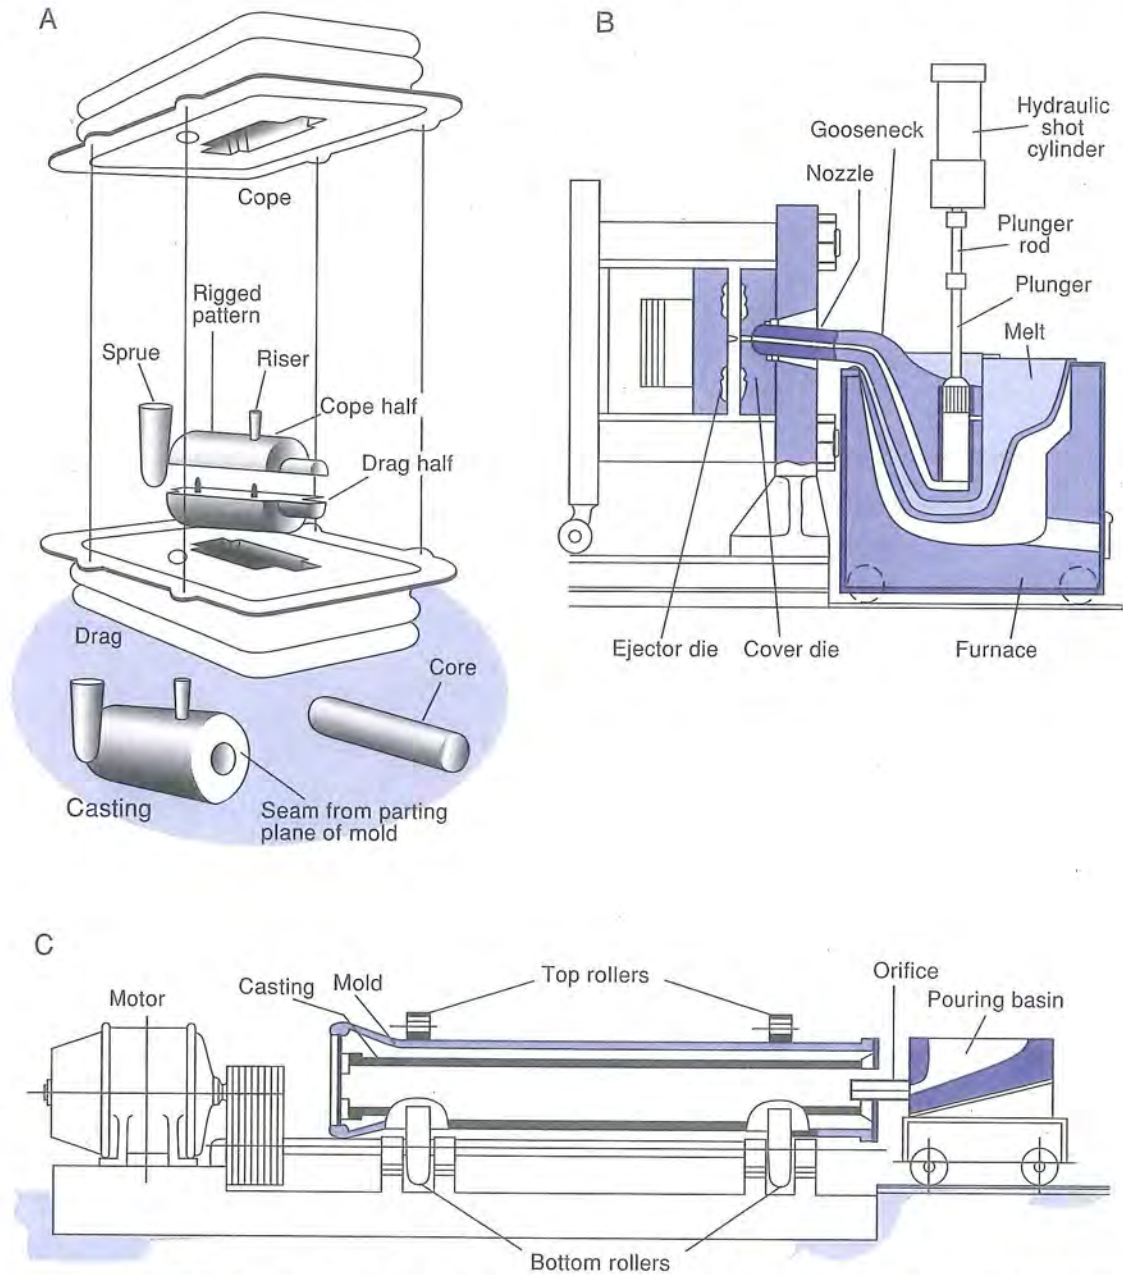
Casting methods. (A) Sand casting. From H. J. Heine, *Casting Design and Applications* (Fall, 1989). (B) Hot chamber die casting. (C) Centrifugal casting of pipes.
